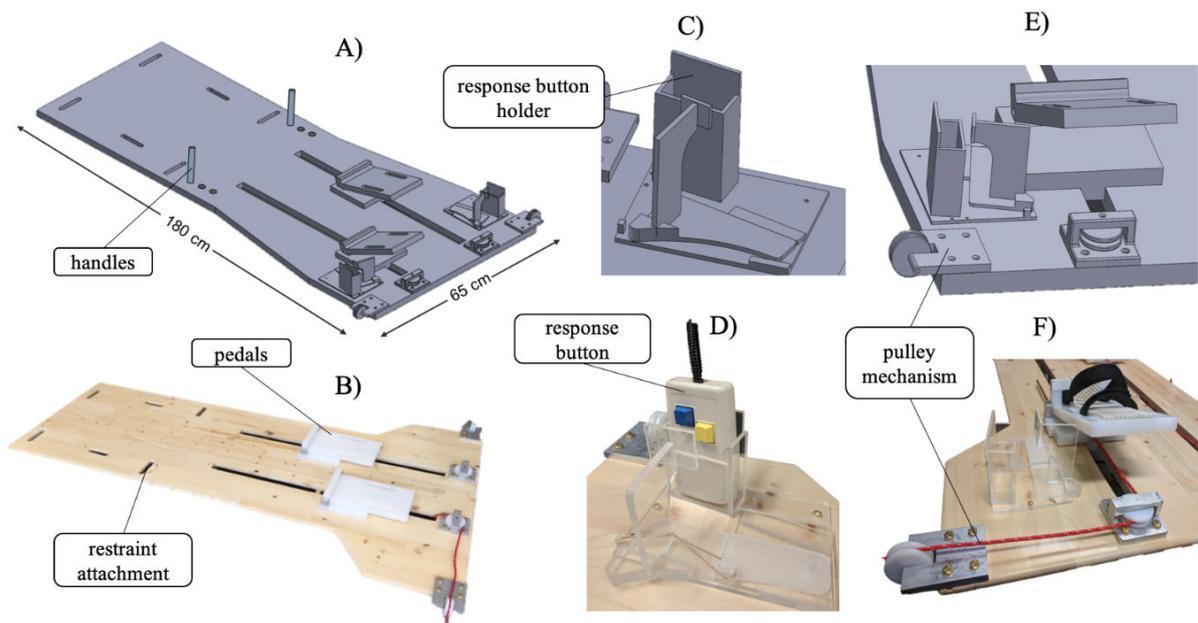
A CAD design of the MR apparatus including dimensions to assist with scale. This figure shows A) the dimensions and handholds, B) the pedals and their tracks, C) response button holders to time stamp stepping and hand holds for participants, D) the response button switch, E) pulley system in CAD and F) pulley system after fabrication.
